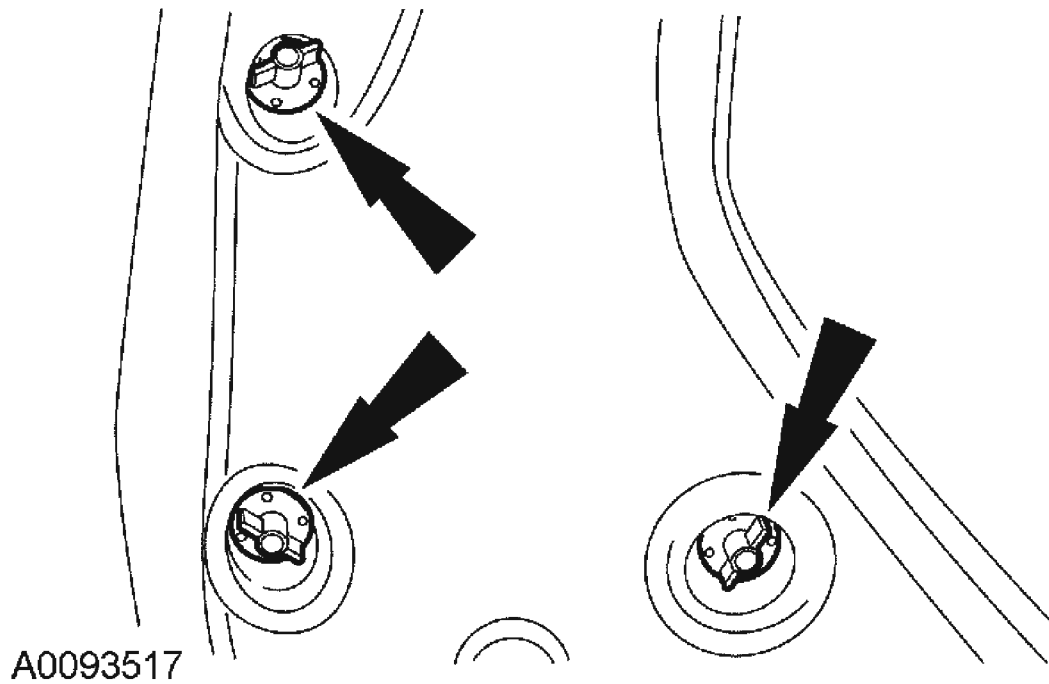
Removing Rear Lamp Retaining Nuts (Sedan)
